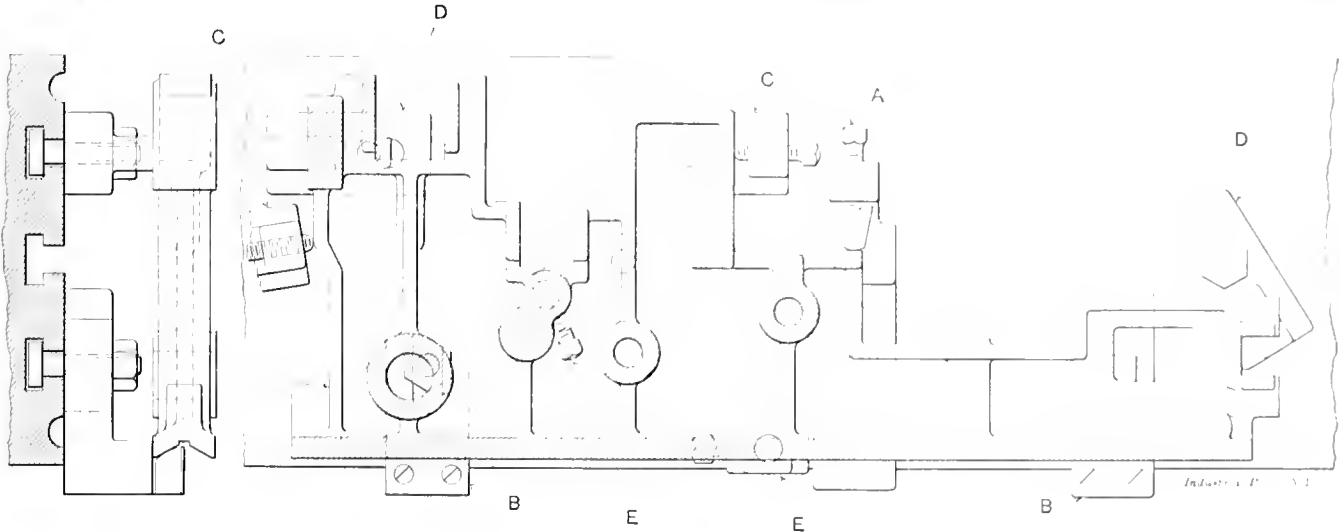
A Sectional Fixture or Jig Holding a Machine Housing on a Milling Machine Platen.
